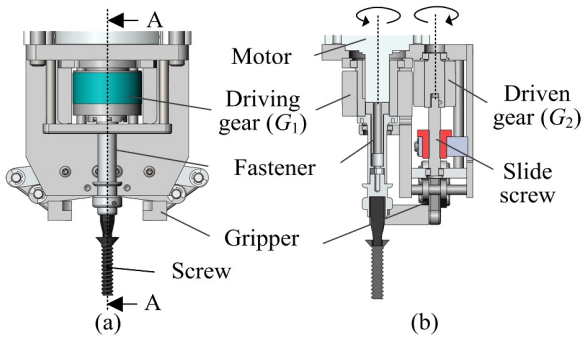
Structure of SFG: (a) front view and (b) A-A cross-sectional view.
